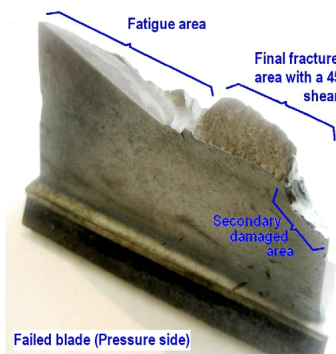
Fracture surface of the GTG D compressor's 1st row moving blade
